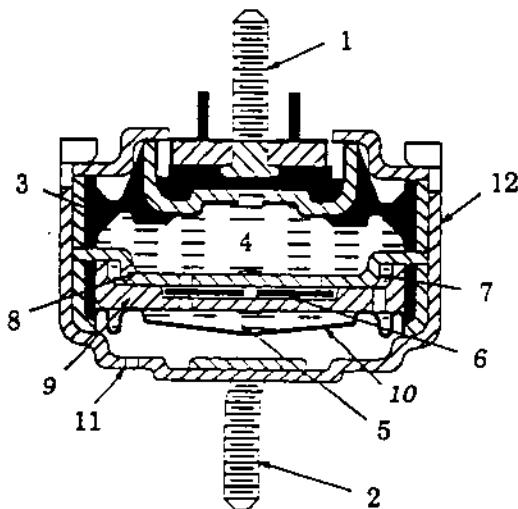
Engine mount components. (1) & (2) mounting studs, (3) rubber which supports engine weight, (4) upper and (5) lower chambers filled with glycol fluid mixture, (6) decoupler, (7) inertia track, (8) upper and (9) lower plates which define decoupler gap, (10) lower chamber thin rubber bellow, (11) air breather, and (12) canister. See Kim and Singh [6] for a more complete description.
